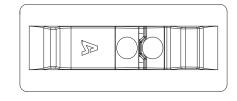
ADNS-6130-001 laser mouse trim lens outline drawings and details
